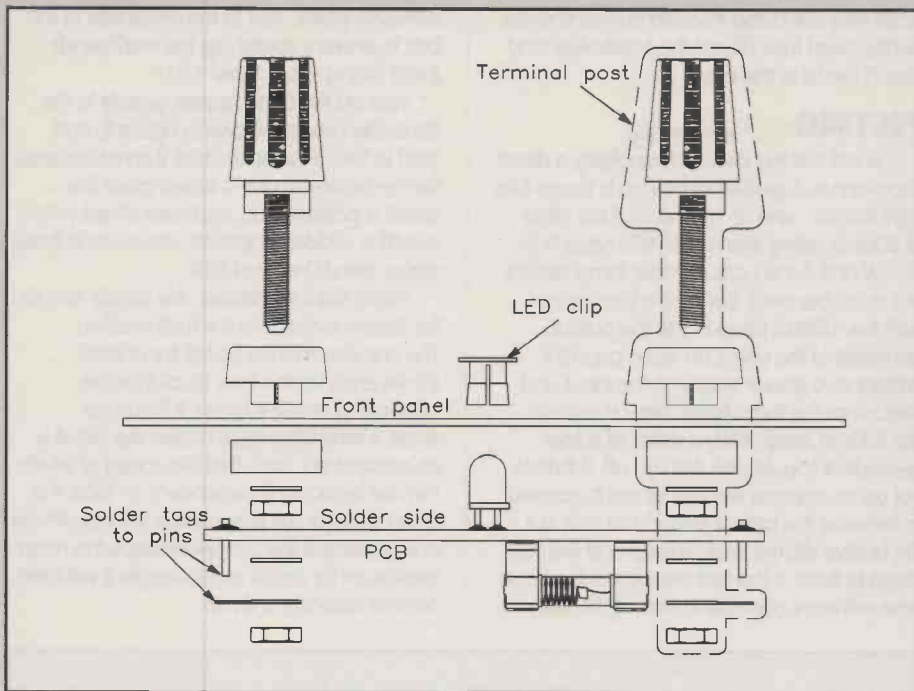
Exploded assembly diagram, showing fitting of terminal posts to front panel and PCB.
